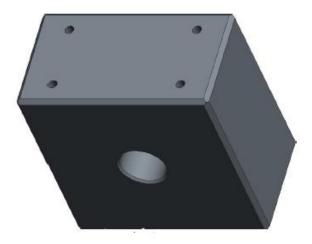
Lower base part showing M5 holes for sheet support and M24 hole for electrode adaptor holder
